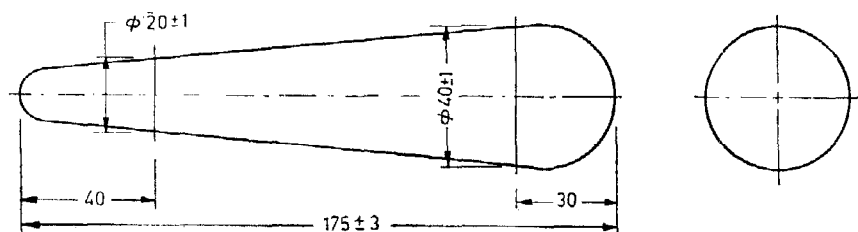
SWEEPING BROOM — SHAPE AND DESIGN
